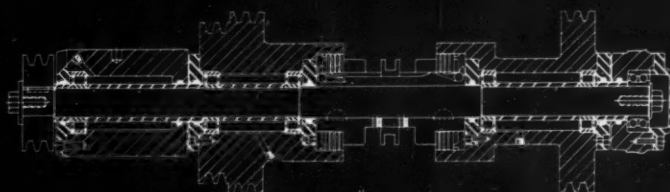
Shaft sleeves space the bearings in simplified mounting design
